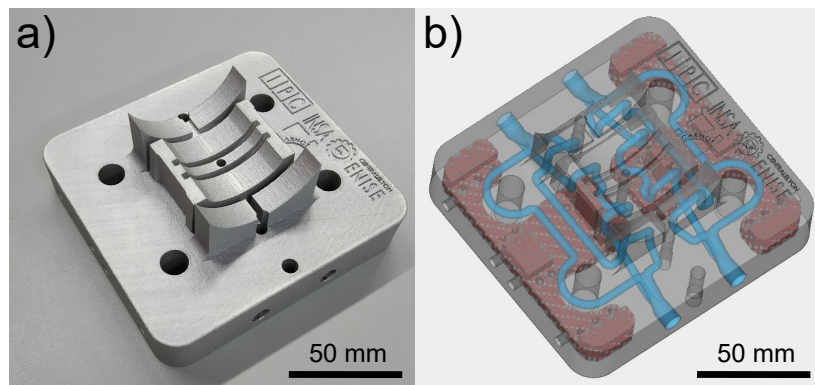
Examples of molds printed in PM420. The dimensions of the mold are 100x100x20 mm for the platform and 50x50x20 mm for the molding surface. b) highlights in red the lattice structure in the mold and in blue the cooling channels.
